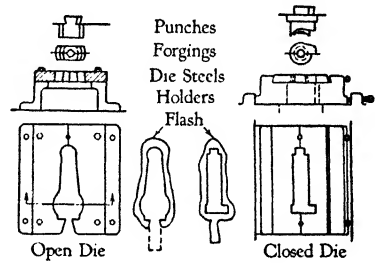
Typical open and closed dies for trimming the flash from drop forgings.
